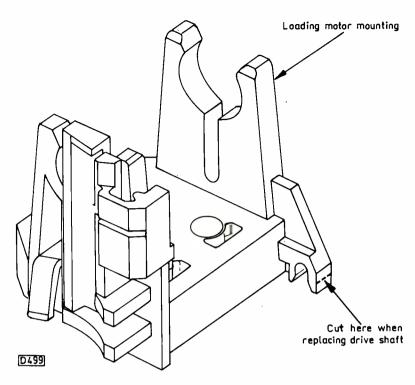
Position of the inverted U-shaped bracket that holds one end of drive shaft 47. The bracket is part of the loading-motor mounting. Cut the bracket as shown above when replacing the drive shaft.
